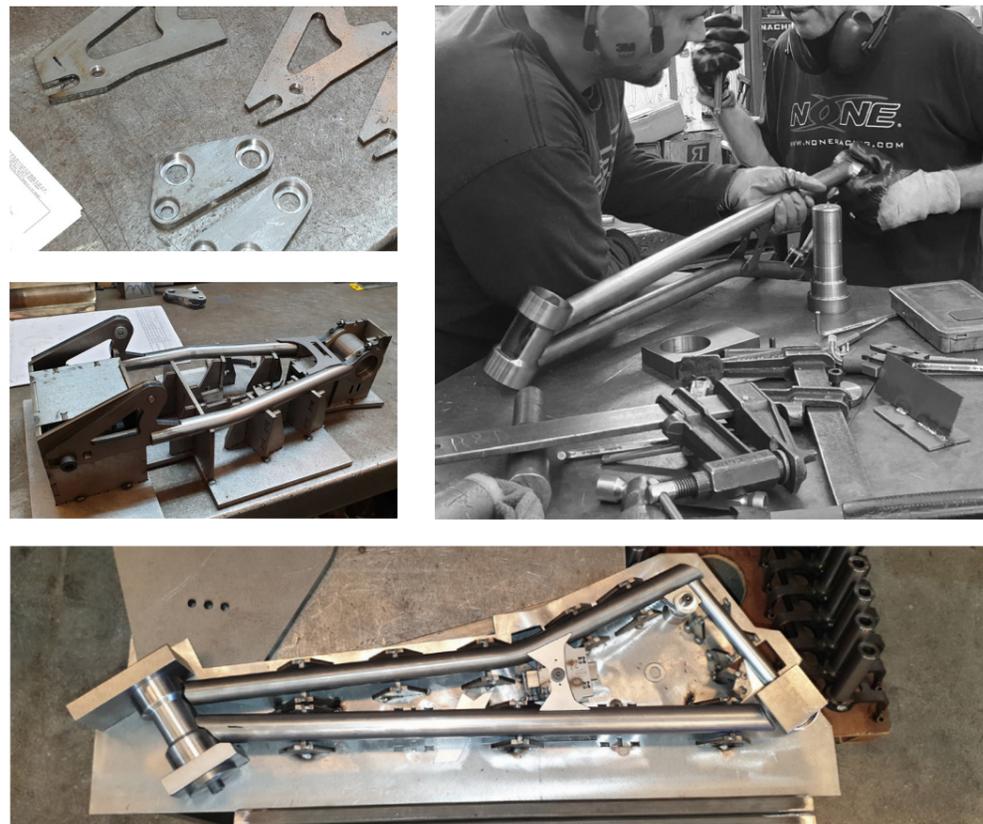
Photos taken during the assembly journey at the Dmotors factory (Engine derivatives).
